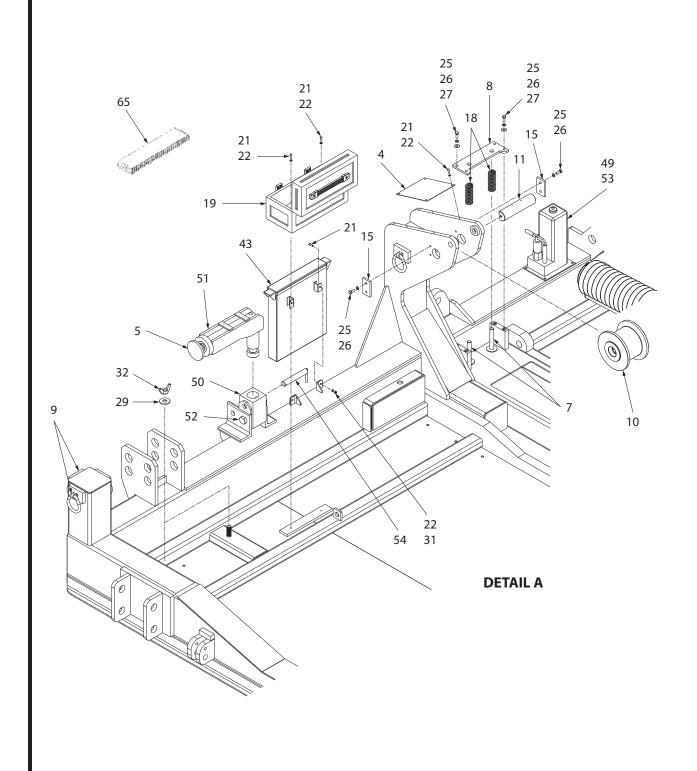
AGSE-E18401-S01 Base Assembly
